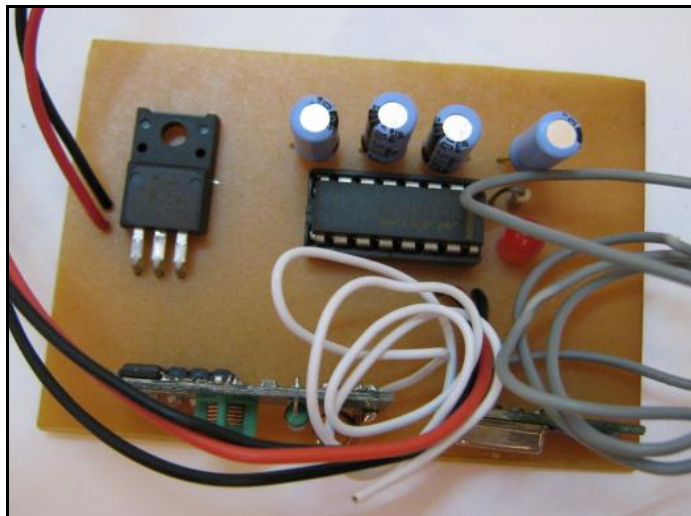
After solder (device for receiving or transmitting from/to PC part)
